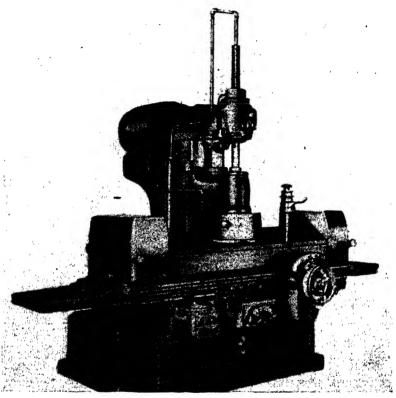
Pratt and Whitney vertical-spindle surface-grinding machine. As with the other grinding machines the table carries the work past the grinding wheel. Here the wheel has the same action as in the face-grinding machine shown in Fig. 40 as the face is used against the work. The only difference is that the spindle in one is horizontal and in the other, vertical. The choice depends largely on the size of the work to be done. For very large work the machine shown in Fig. 40 has several advantages.
